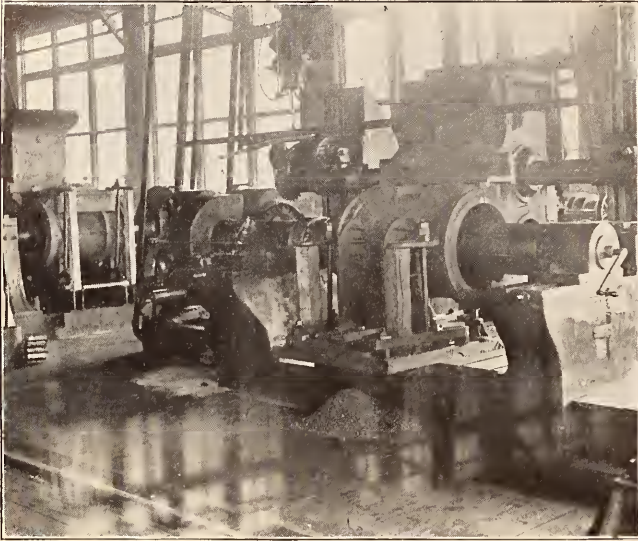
BEMENT-MILES 3-SPINDLE BORING MACHINE. AT C., M. & ST. P. RY. SHOPS.
